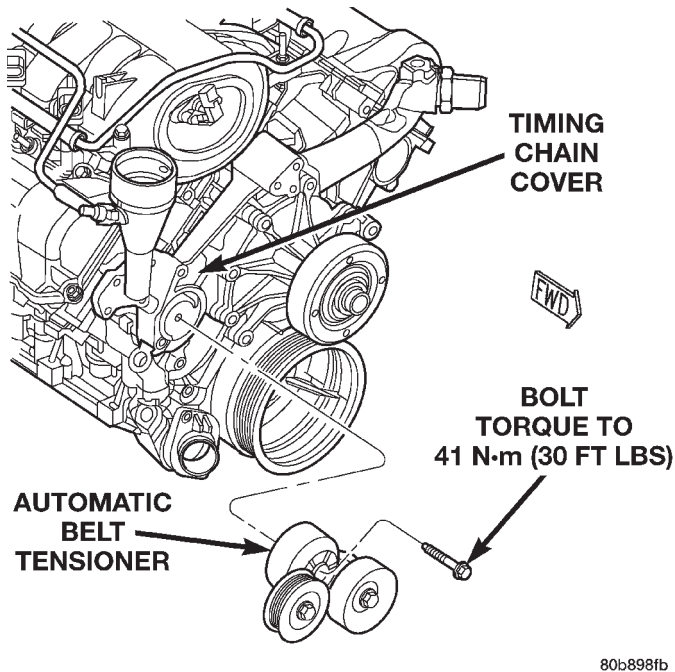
Automatic Belt Tensioner—4.7L Engine
